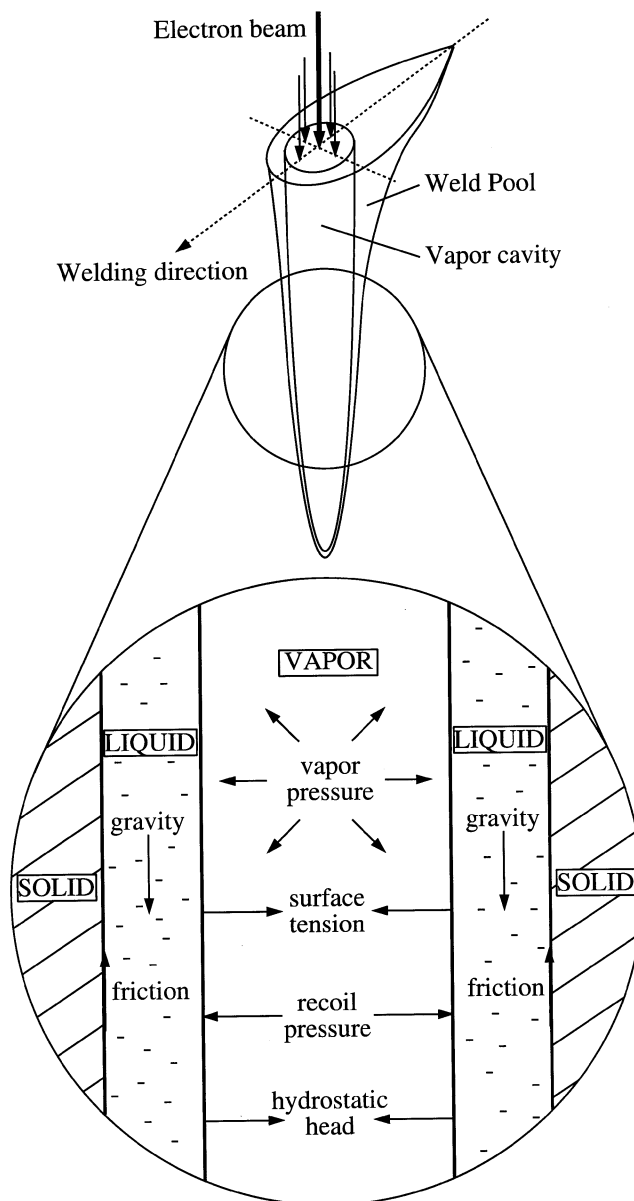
Schematic illustration of the balance of forces in the vapor cavity and weld pool within a keyhole weld.
